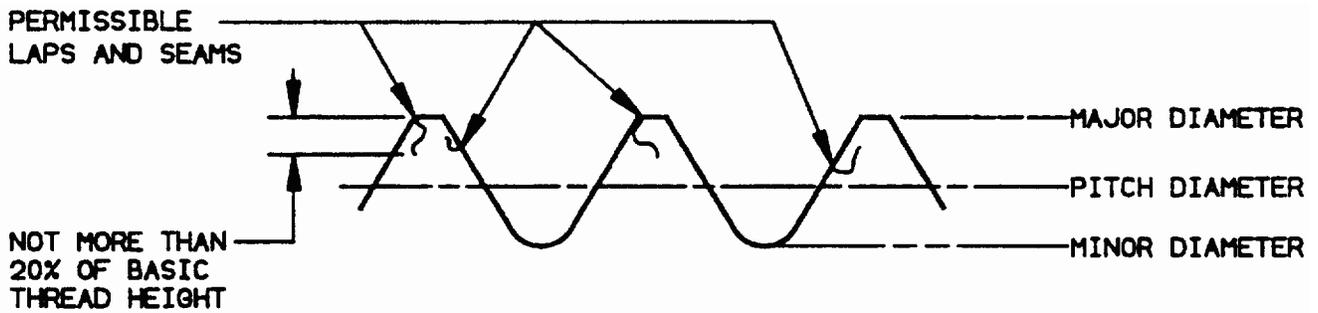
A - LAPS, SEAMS, AND SURFACE THREAD
